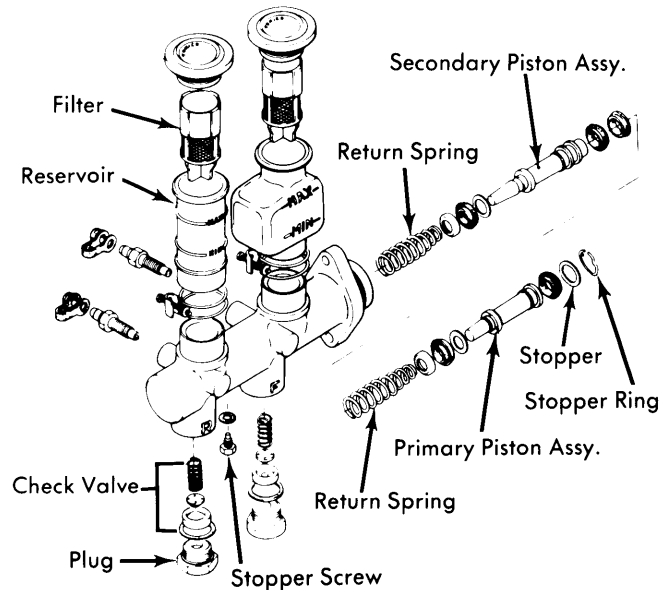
Exploded View of Tikico Made Master Cylinder. Nabco Made Master Cylinder is Similar But Has Different Piston Configuration
